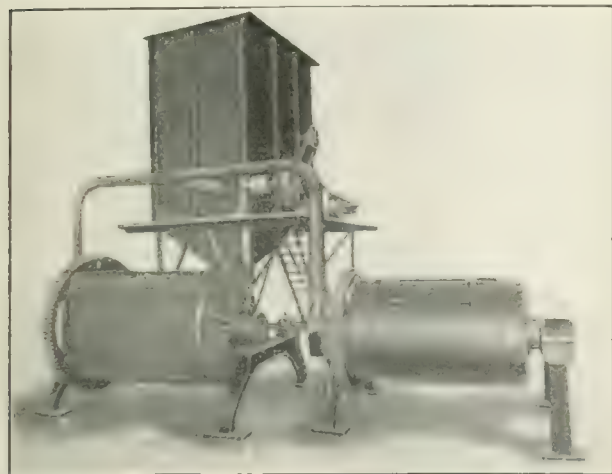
Typical Arrangement of Two Sly Mills Piped to a Dust Arrester.
